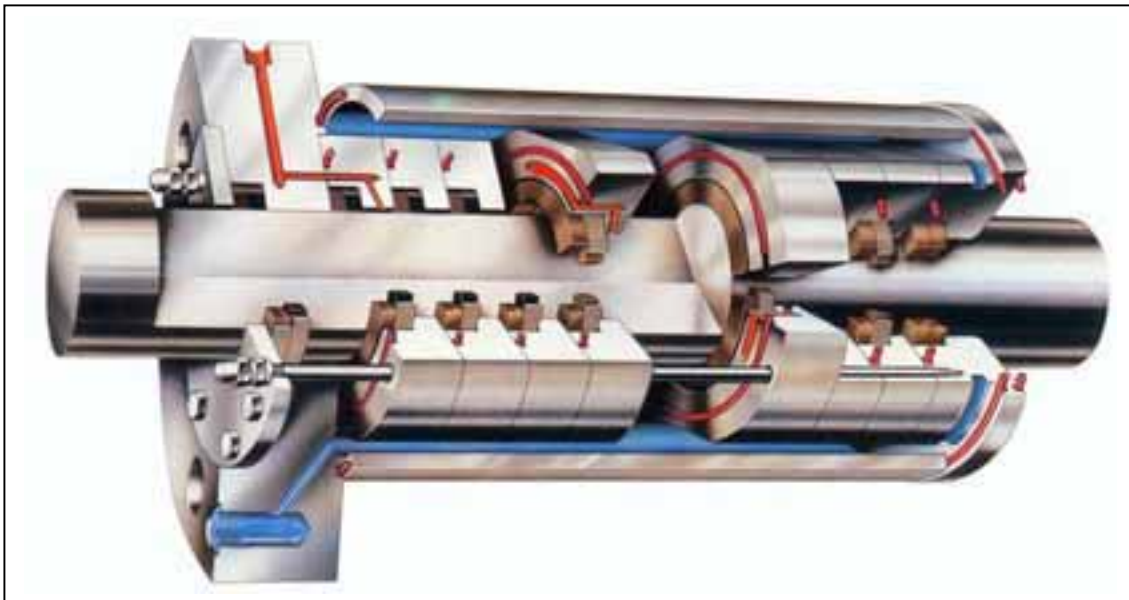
,4 – 11 Piston Rod Gas Packing Cut-Away.
